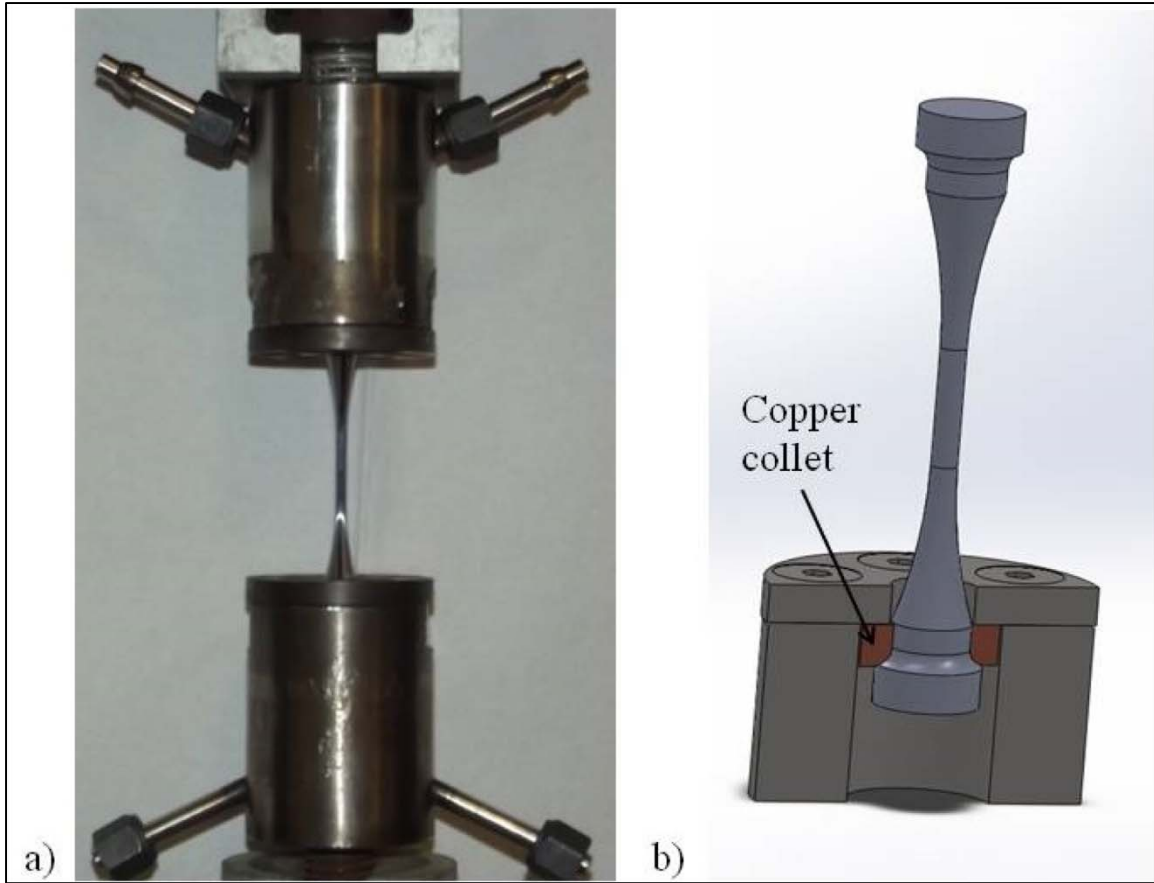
Uniaxial tensile strength testing configuration showing: (a) specimen fixture with coolant ports, (b) SolidWorks* cutaway view of specimen fixture showing copper collet gripping mechanism.
